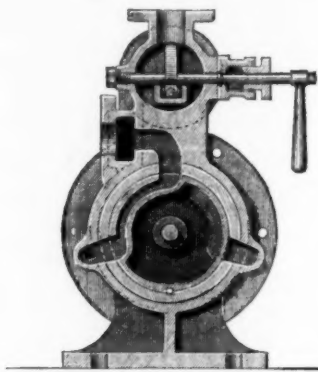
Section of Cylinder, Steam Chest and Piston.
